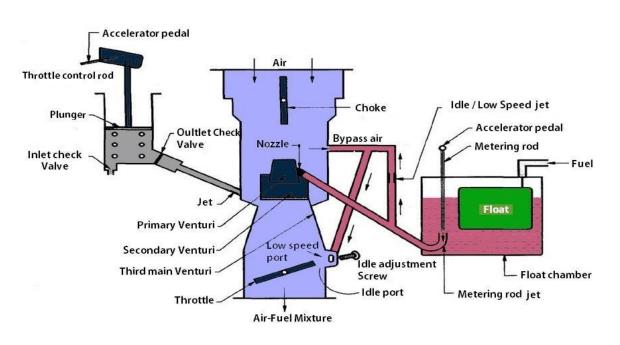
Construction of Carter Carburetor Zenith Carburetor:
